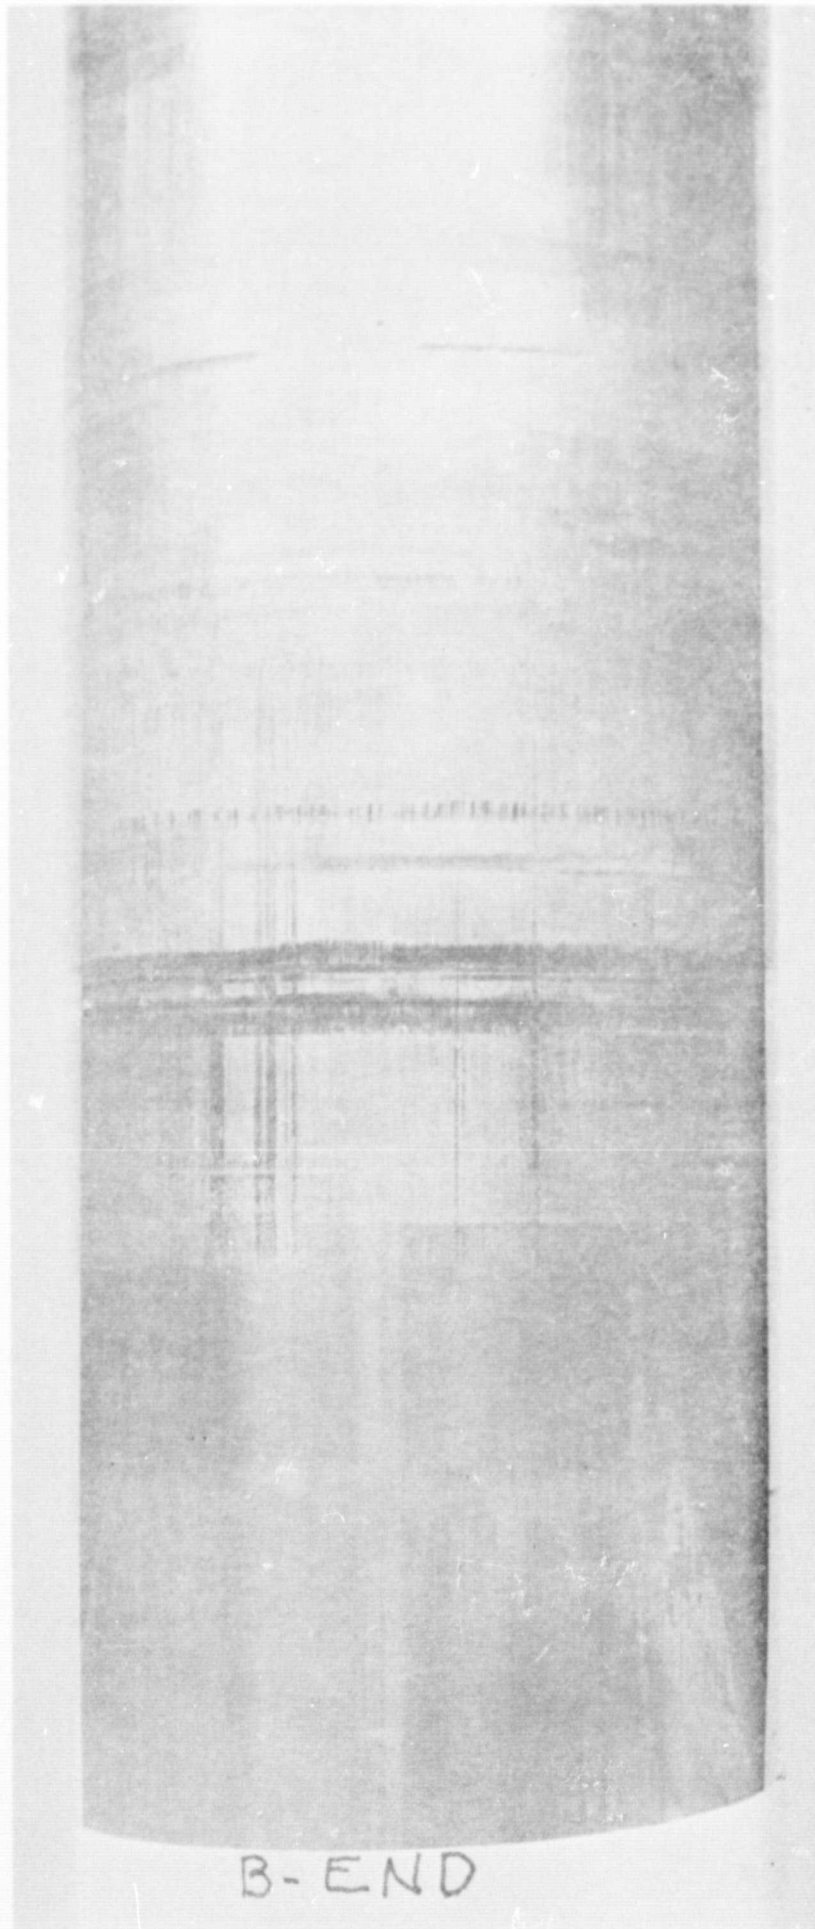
Piston Rod, B-End, Three-Inch Cobalt Molybdenum Lip Seal
